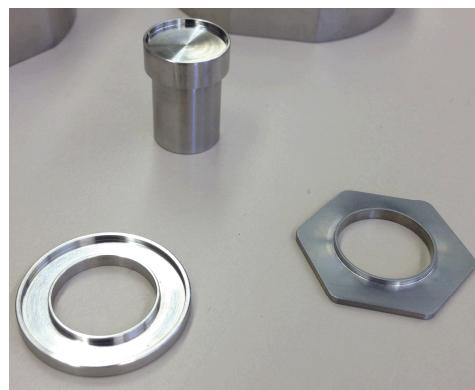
Laser weld specimen parts: inner threaded stud (top) and outer radial disk (left) or outer torsion disk (right).
